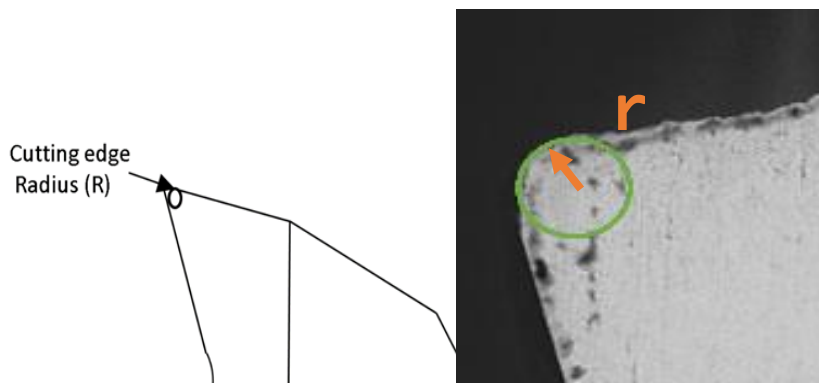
Schematic diagram of the cutting edge radius (left), SEM image of tool edge (right)
